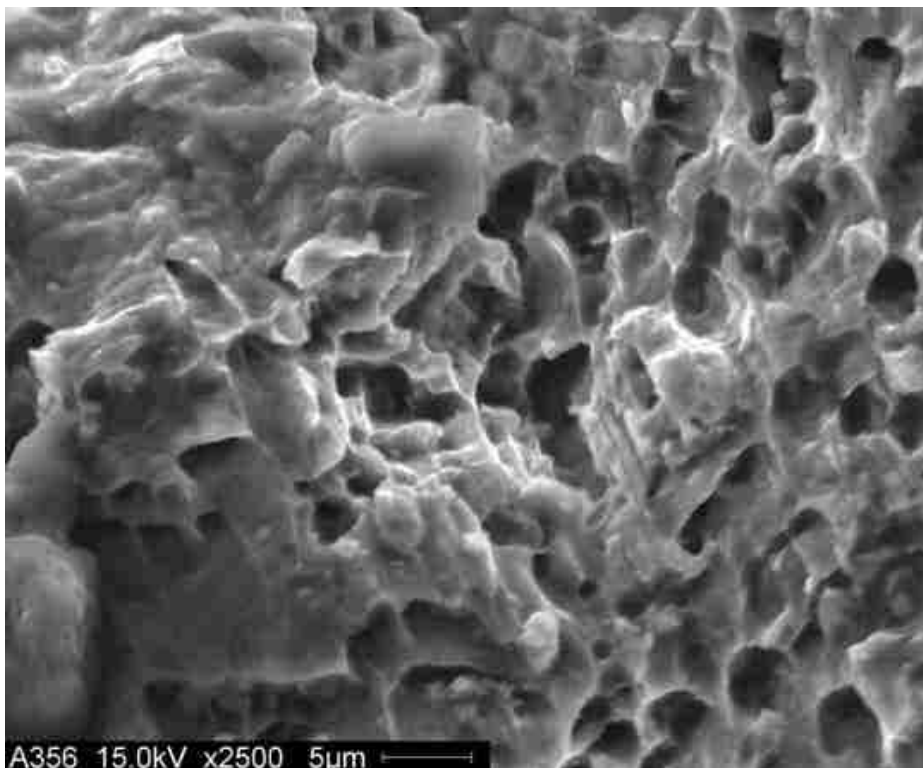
SEM fractograph showing the fracture surface of T6 cast alloy A356.
